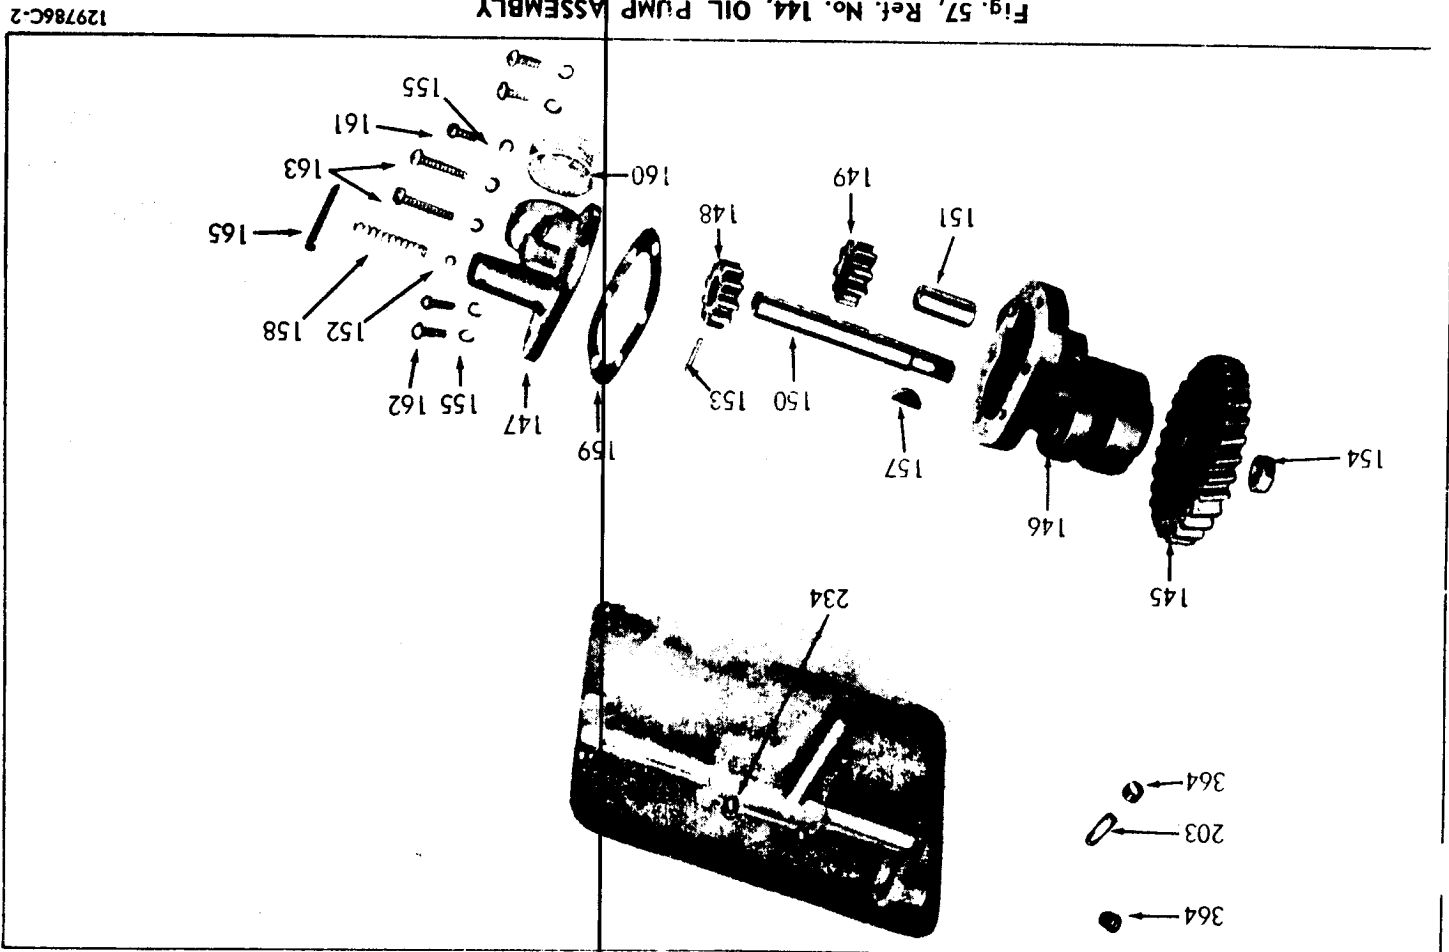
, Ref. No. 144, OIL PUMP ASSEMBLY
